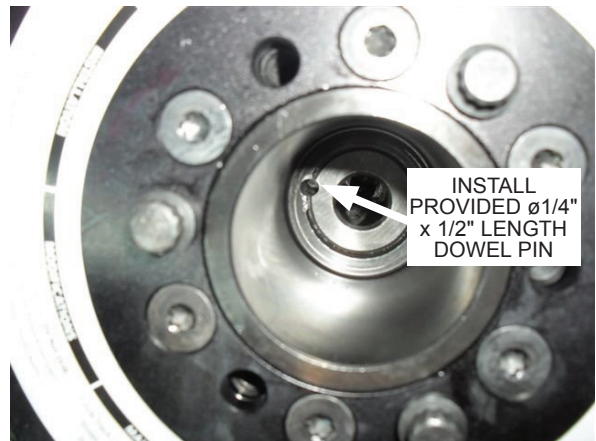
e: Inspect Dowel Pin Hole & Install Dowel Pin
